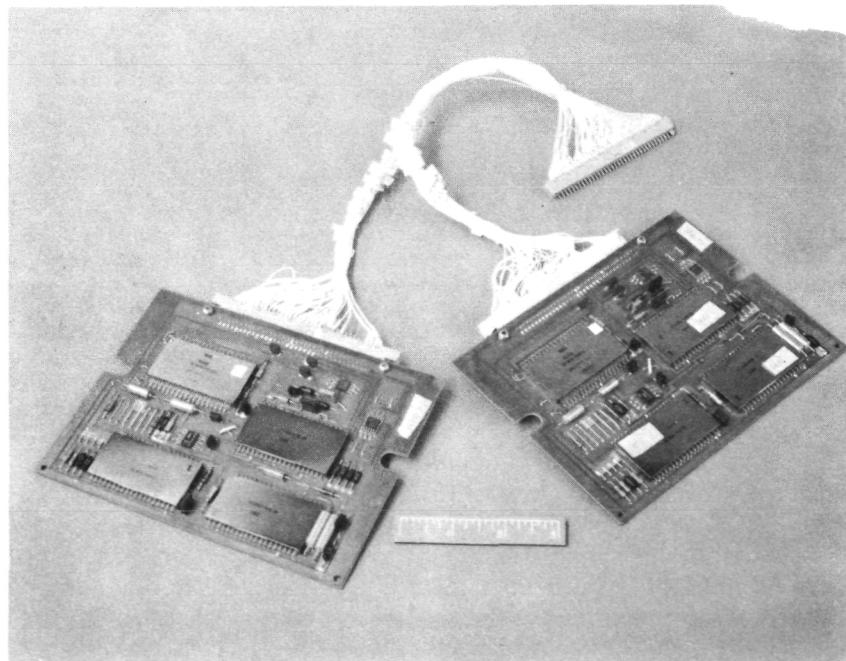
Multiwire Boards Connected Together to Functionally Duplicate a FASCOS Multi-layer Board
